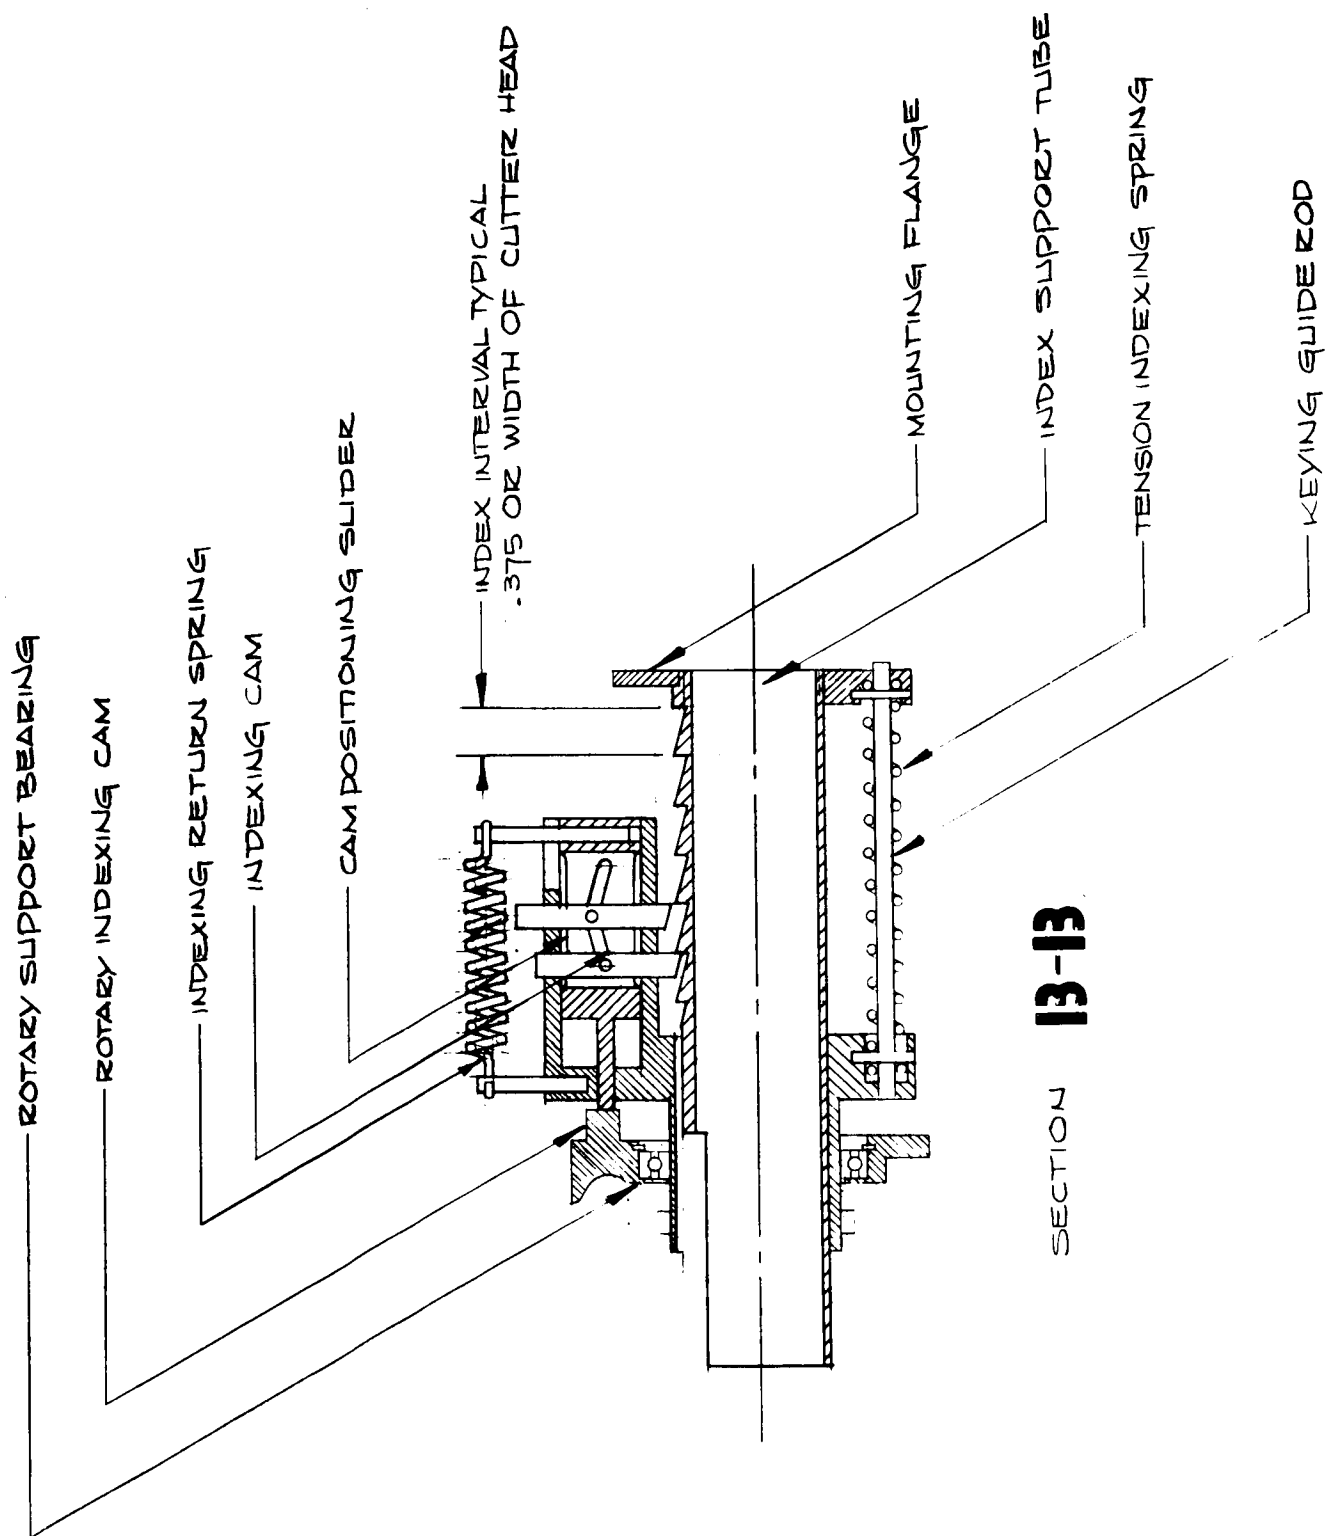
SECTIONAL VIEW THROUGH ESCAPEMENT MECHANISM
